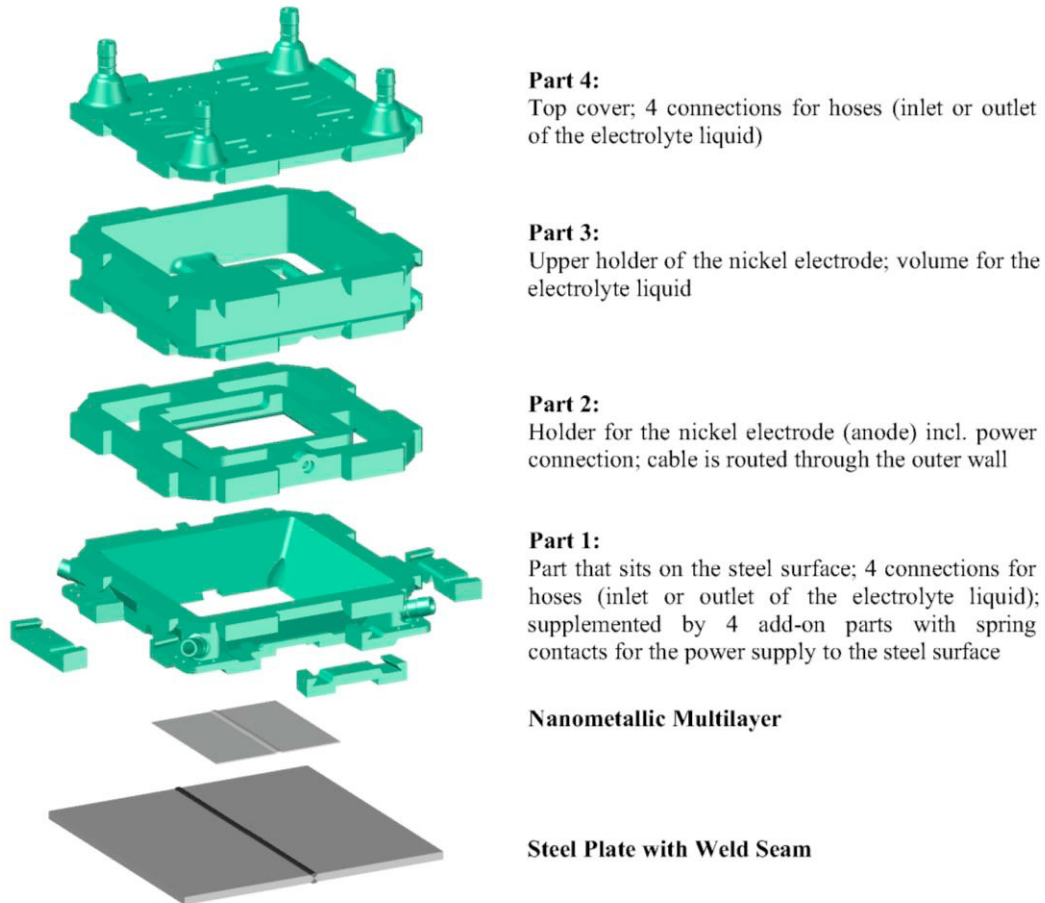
Composition of the coating device, NMM and steel plate with weld seam.
